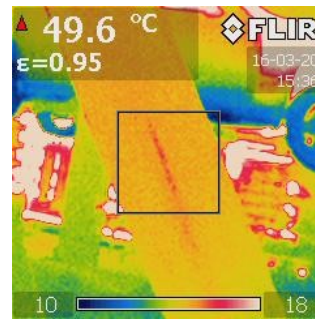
Incipient defect (burrs of the inner surface of the cylinder)
